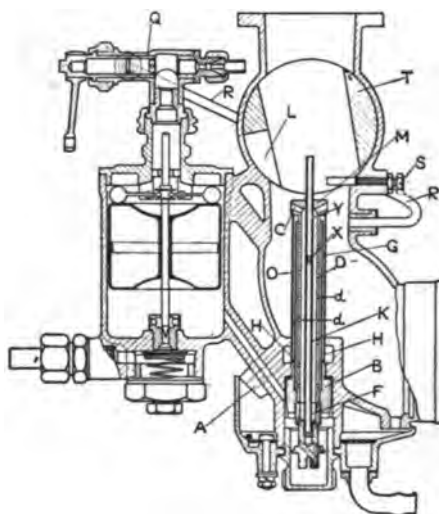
Claudel Hobson carburetter. (D) Depression tube having numerous drilled holes (*dd*). (B) Plug in carburetter body carrying main jet (*J*). (G) Guard tube. (M) Emulsion head with holes (C). (H) Connecting holes to atmosphere at base of tube (O), and air holes (A). (K) Slow-running jet. (T) Throttle barrel having slot (L) forming choke around pilot jet when throttle is closed. (S) "Air screw" for adjusting strength of mixture when running slow. (A) Air hole. (O) Outer tube. (F) Holes at base of jet. (X) Restriction regulating amount of fuel passing. (Y) Air admission holes. (Q) Three-way cock. (R) Fuel connection.
